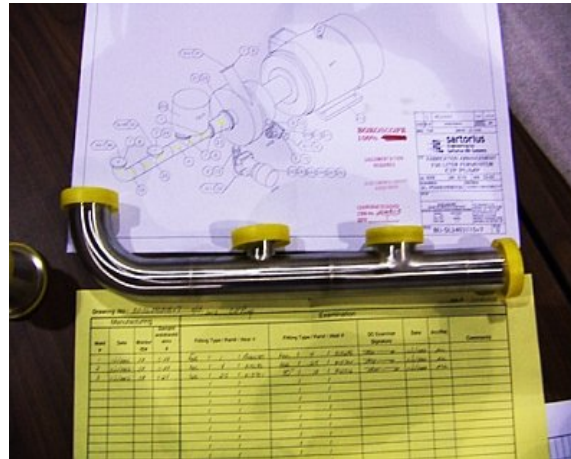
An orbitally welded assembly for a CIP pump for a 750-l fermentor. The location of the assembly is shown on the weld map with the position of each weld numbered. The yellow control document travels with the part as it is fabricated. Photo courtesy of Sartorius BBI Systems, Inc.
